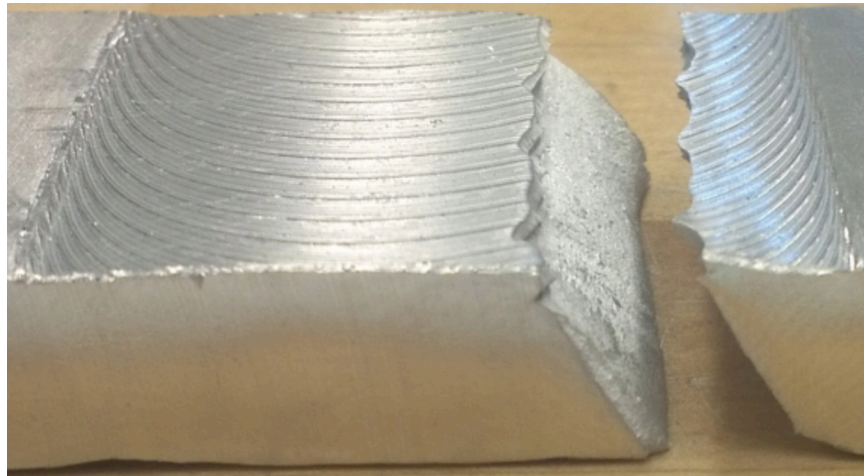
Fracture surface of manually cleaned weld. Note angular ductile fracture.
